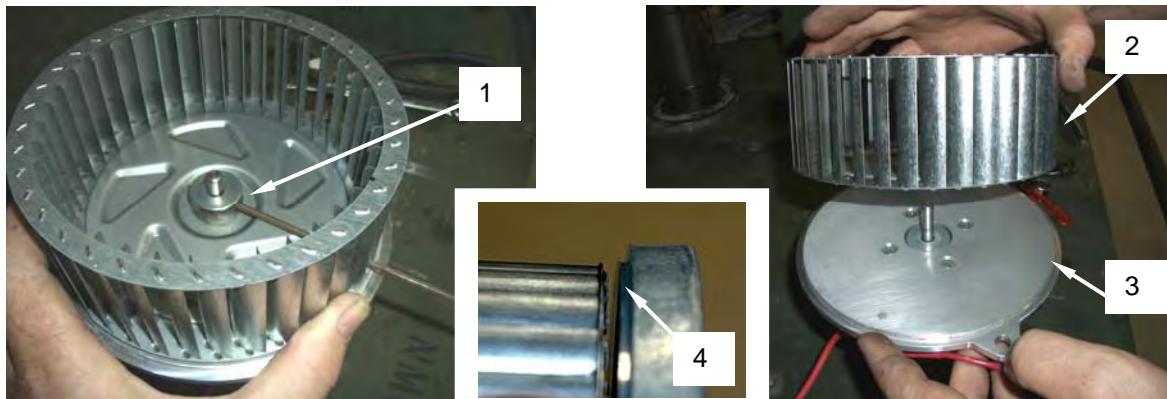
Remove, Clean, and Install Combustion Blower Wheel.
